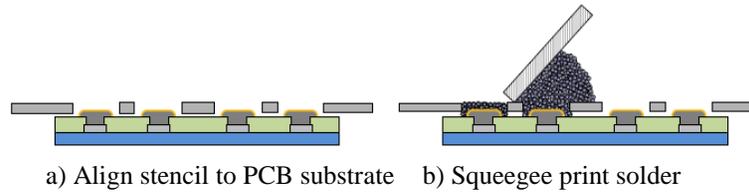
Stencil printing process: solder paste is deposited on a PCB by: a) aligning a stencil template, and b) rolling a bead of solder paste over it. From [Pac Tech-13].
